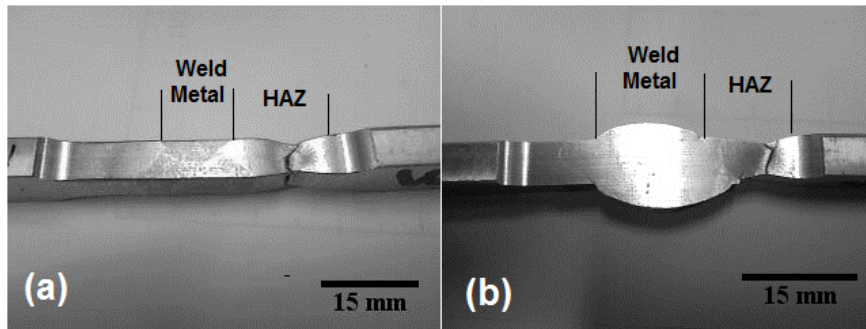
Representative photographs of the tensile fractures observed in (a) fully dressed; and (b) undressed semi-automatic welds in 6061-T651.
